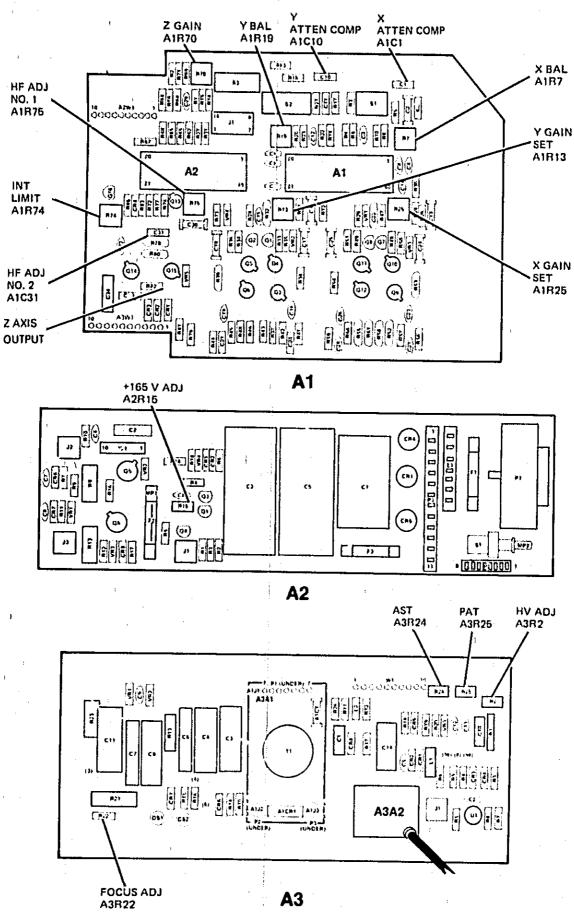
, Se vice Sheet 6, Adjustment Locations 7-15
